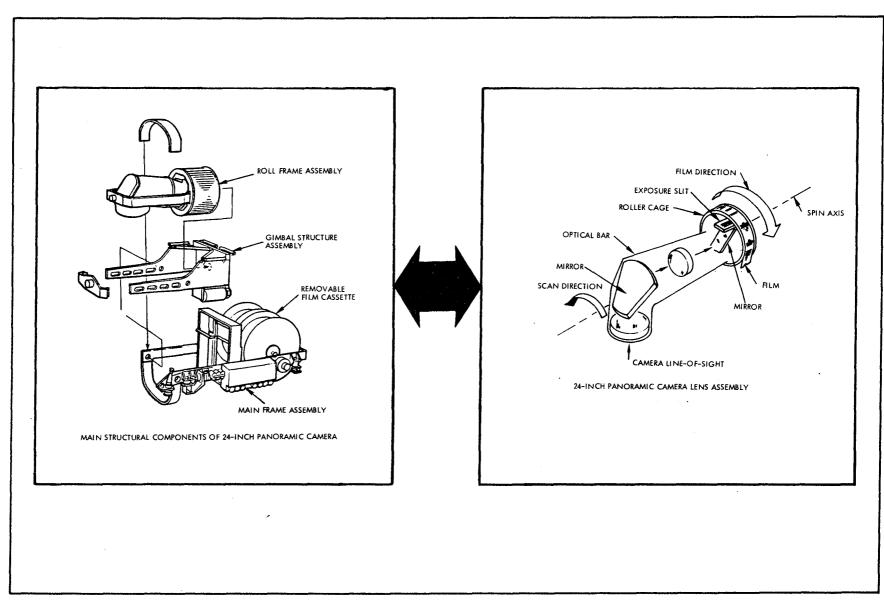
(a). SIM Bay 24-Inch Panoramic Camera - Structure/Lens Detail
